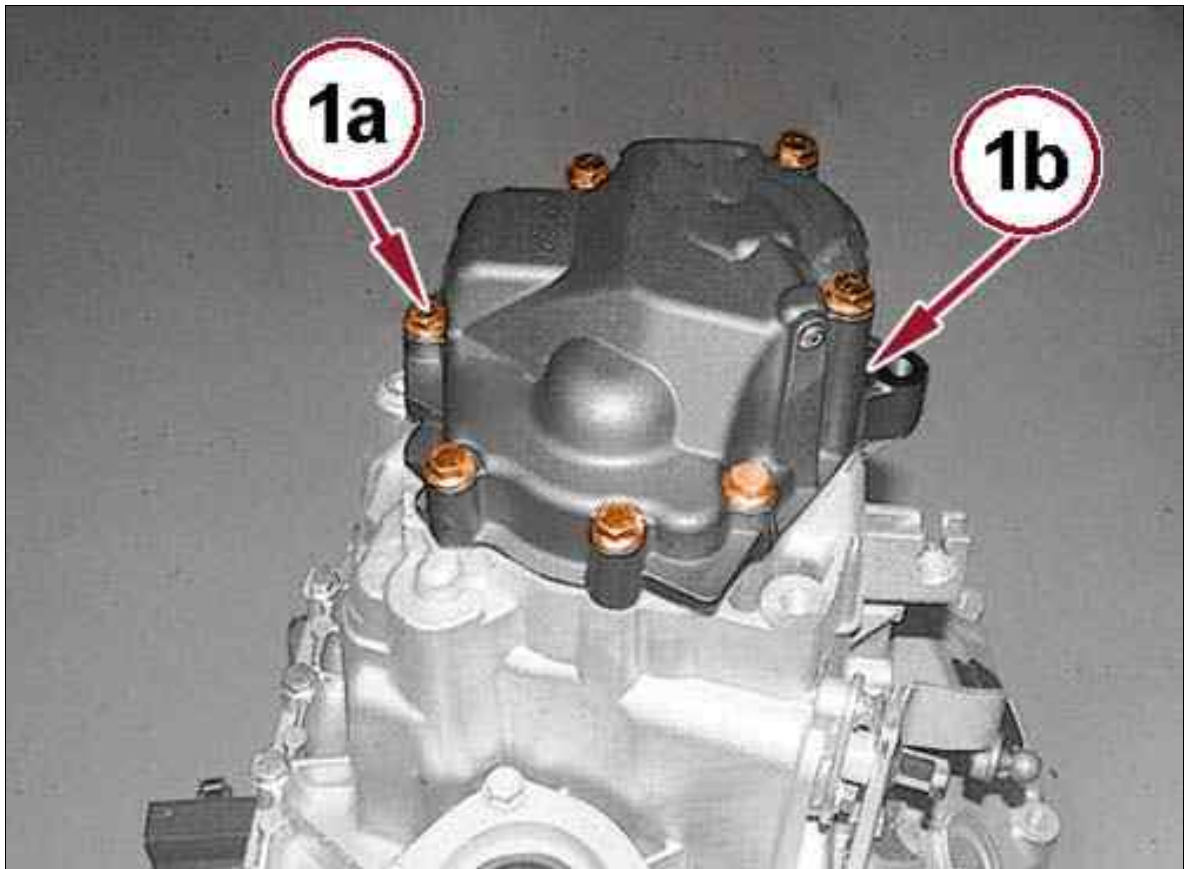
Bolts & Gear Shift Cable Reaction Bracket
